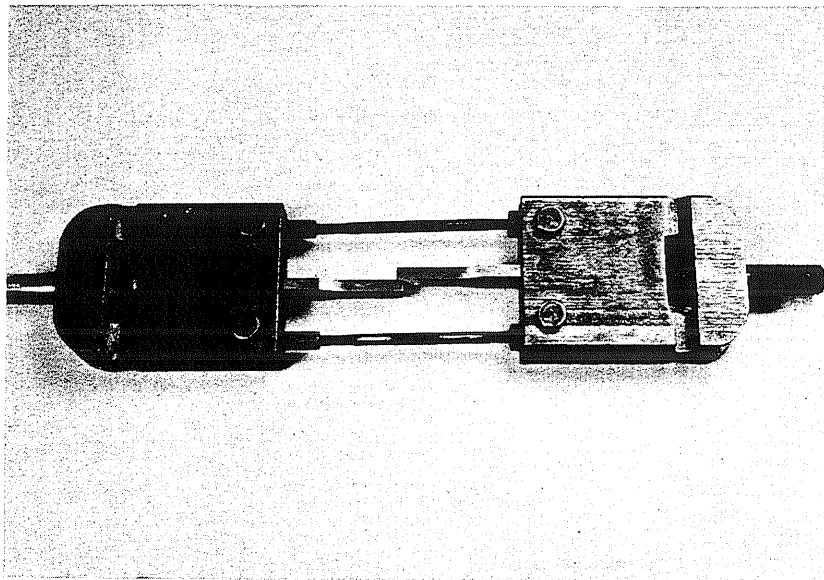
PULL HEAD ASSEMBLY FOR HIGH
